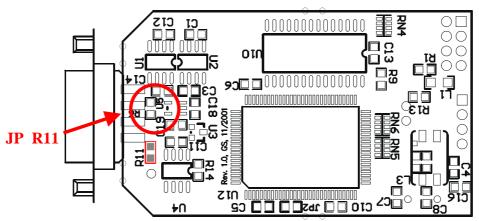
Jumper position at the PCB for Art.Nr. IPEH-002022 (opto-isolated version)
